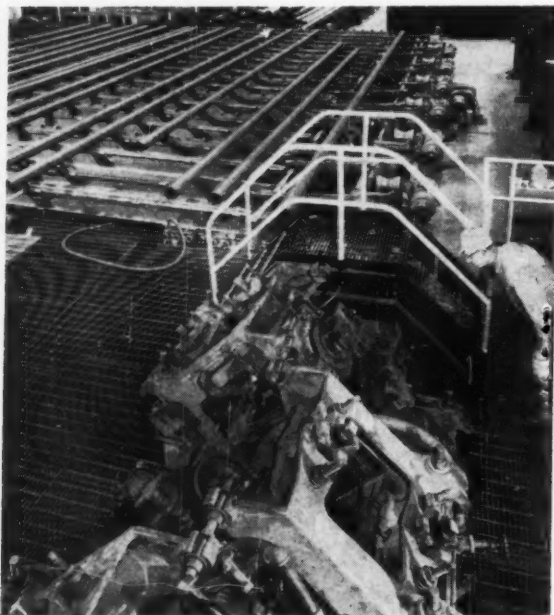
Three-stand reducing mill, foreground, at exit end of tempering furnace, sizes pipe to exact diameter. Cooling bed, top, moves and assembles pipe for further processing.
